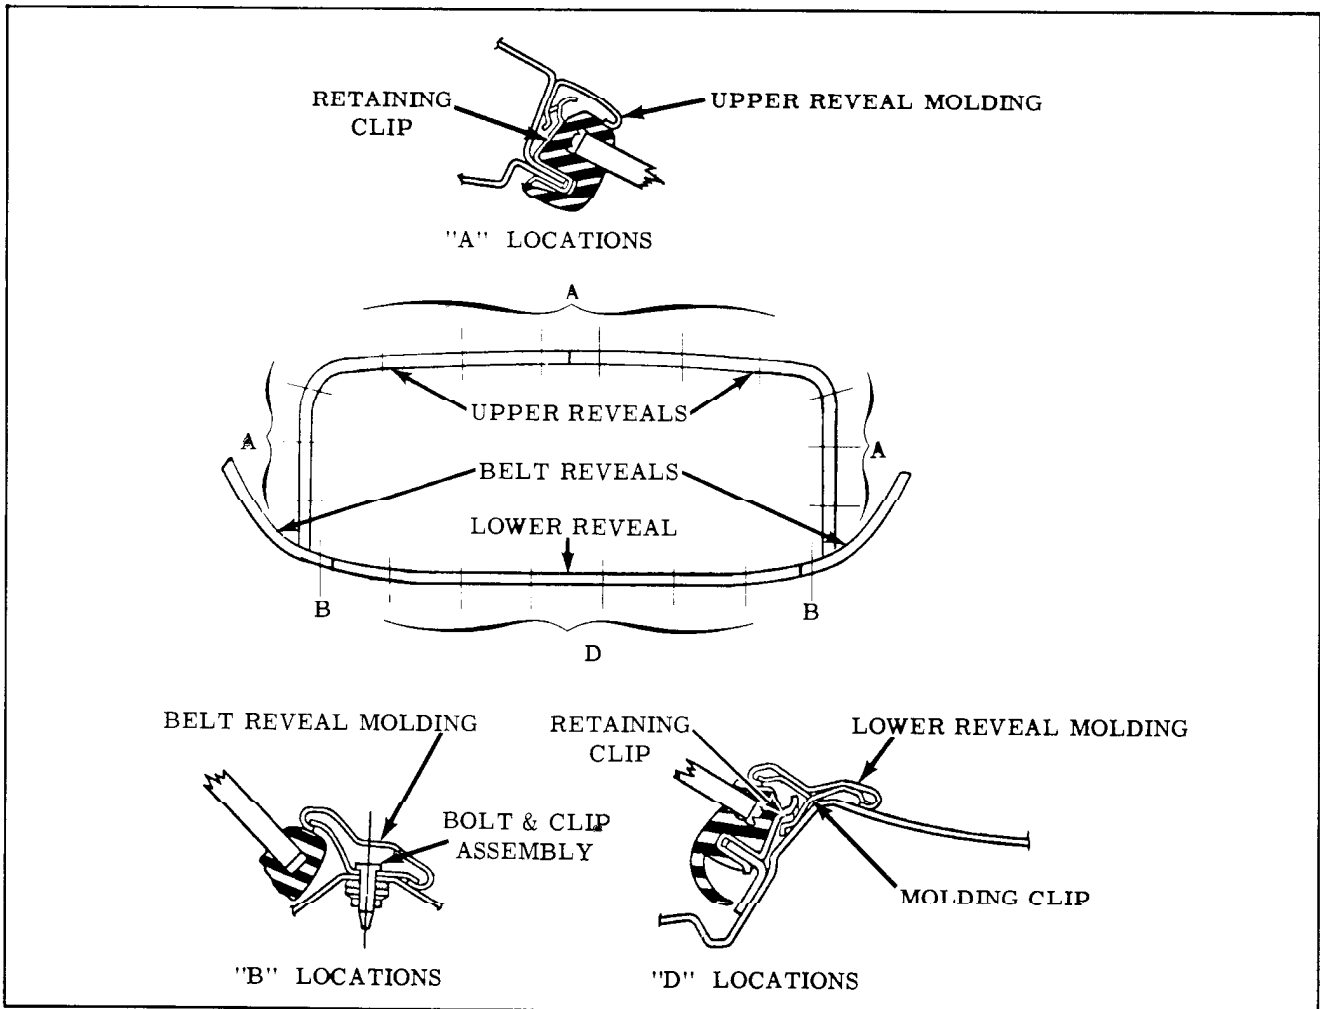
Back Window Reveal Molding (3247, 3547, 3647 Styles)
